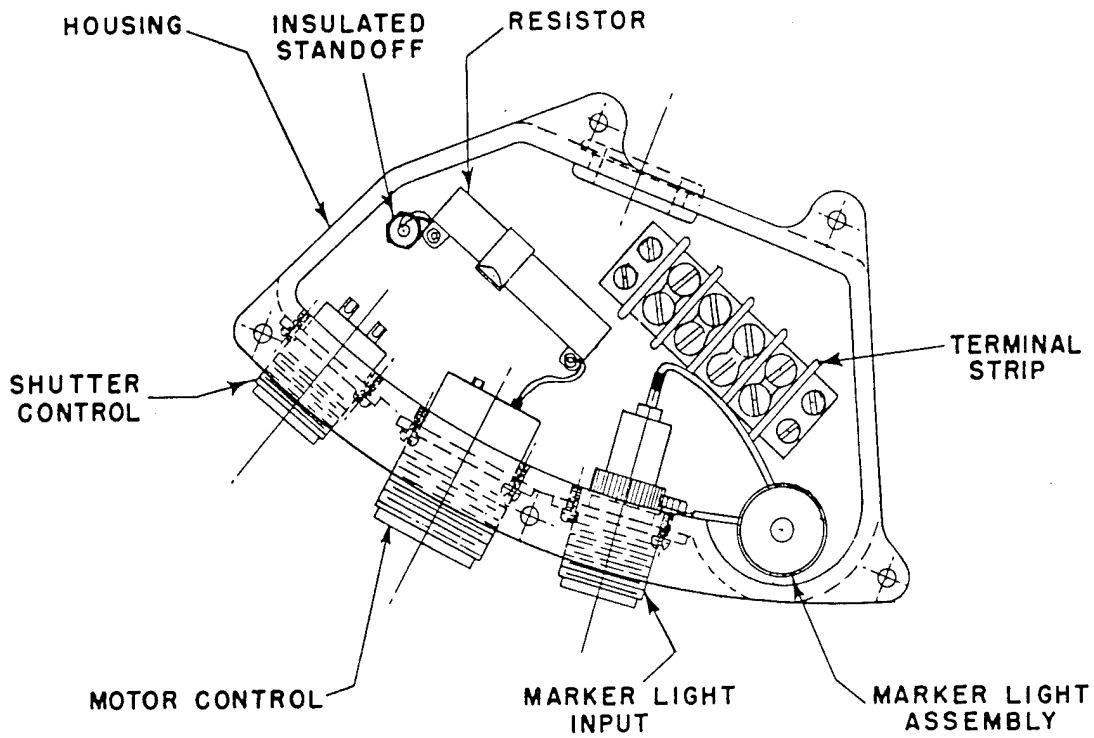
Detailed Diagrammatic View of Connector Housing Assembly
